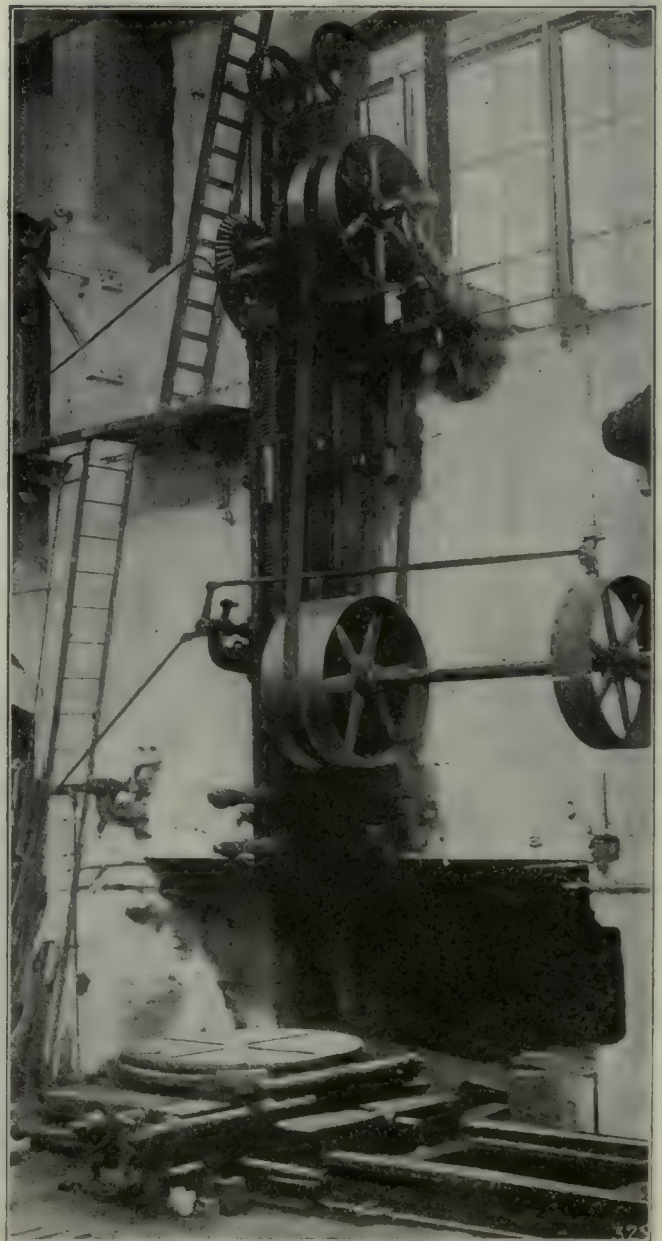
A SLOTTING MACHINE (NOW DISMANTLED)
